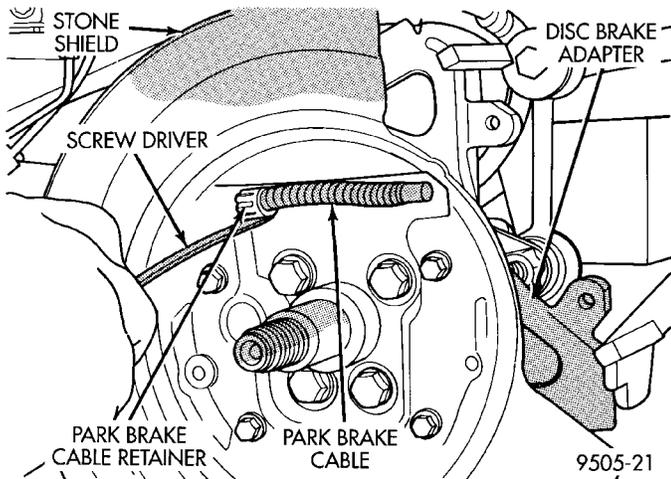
Park Brake Cable Removal From Disc Brake Adapter
